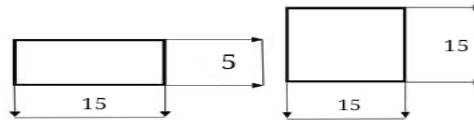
Dimensions of the Rockwell hardness test specimen standard JIS Z 2245
